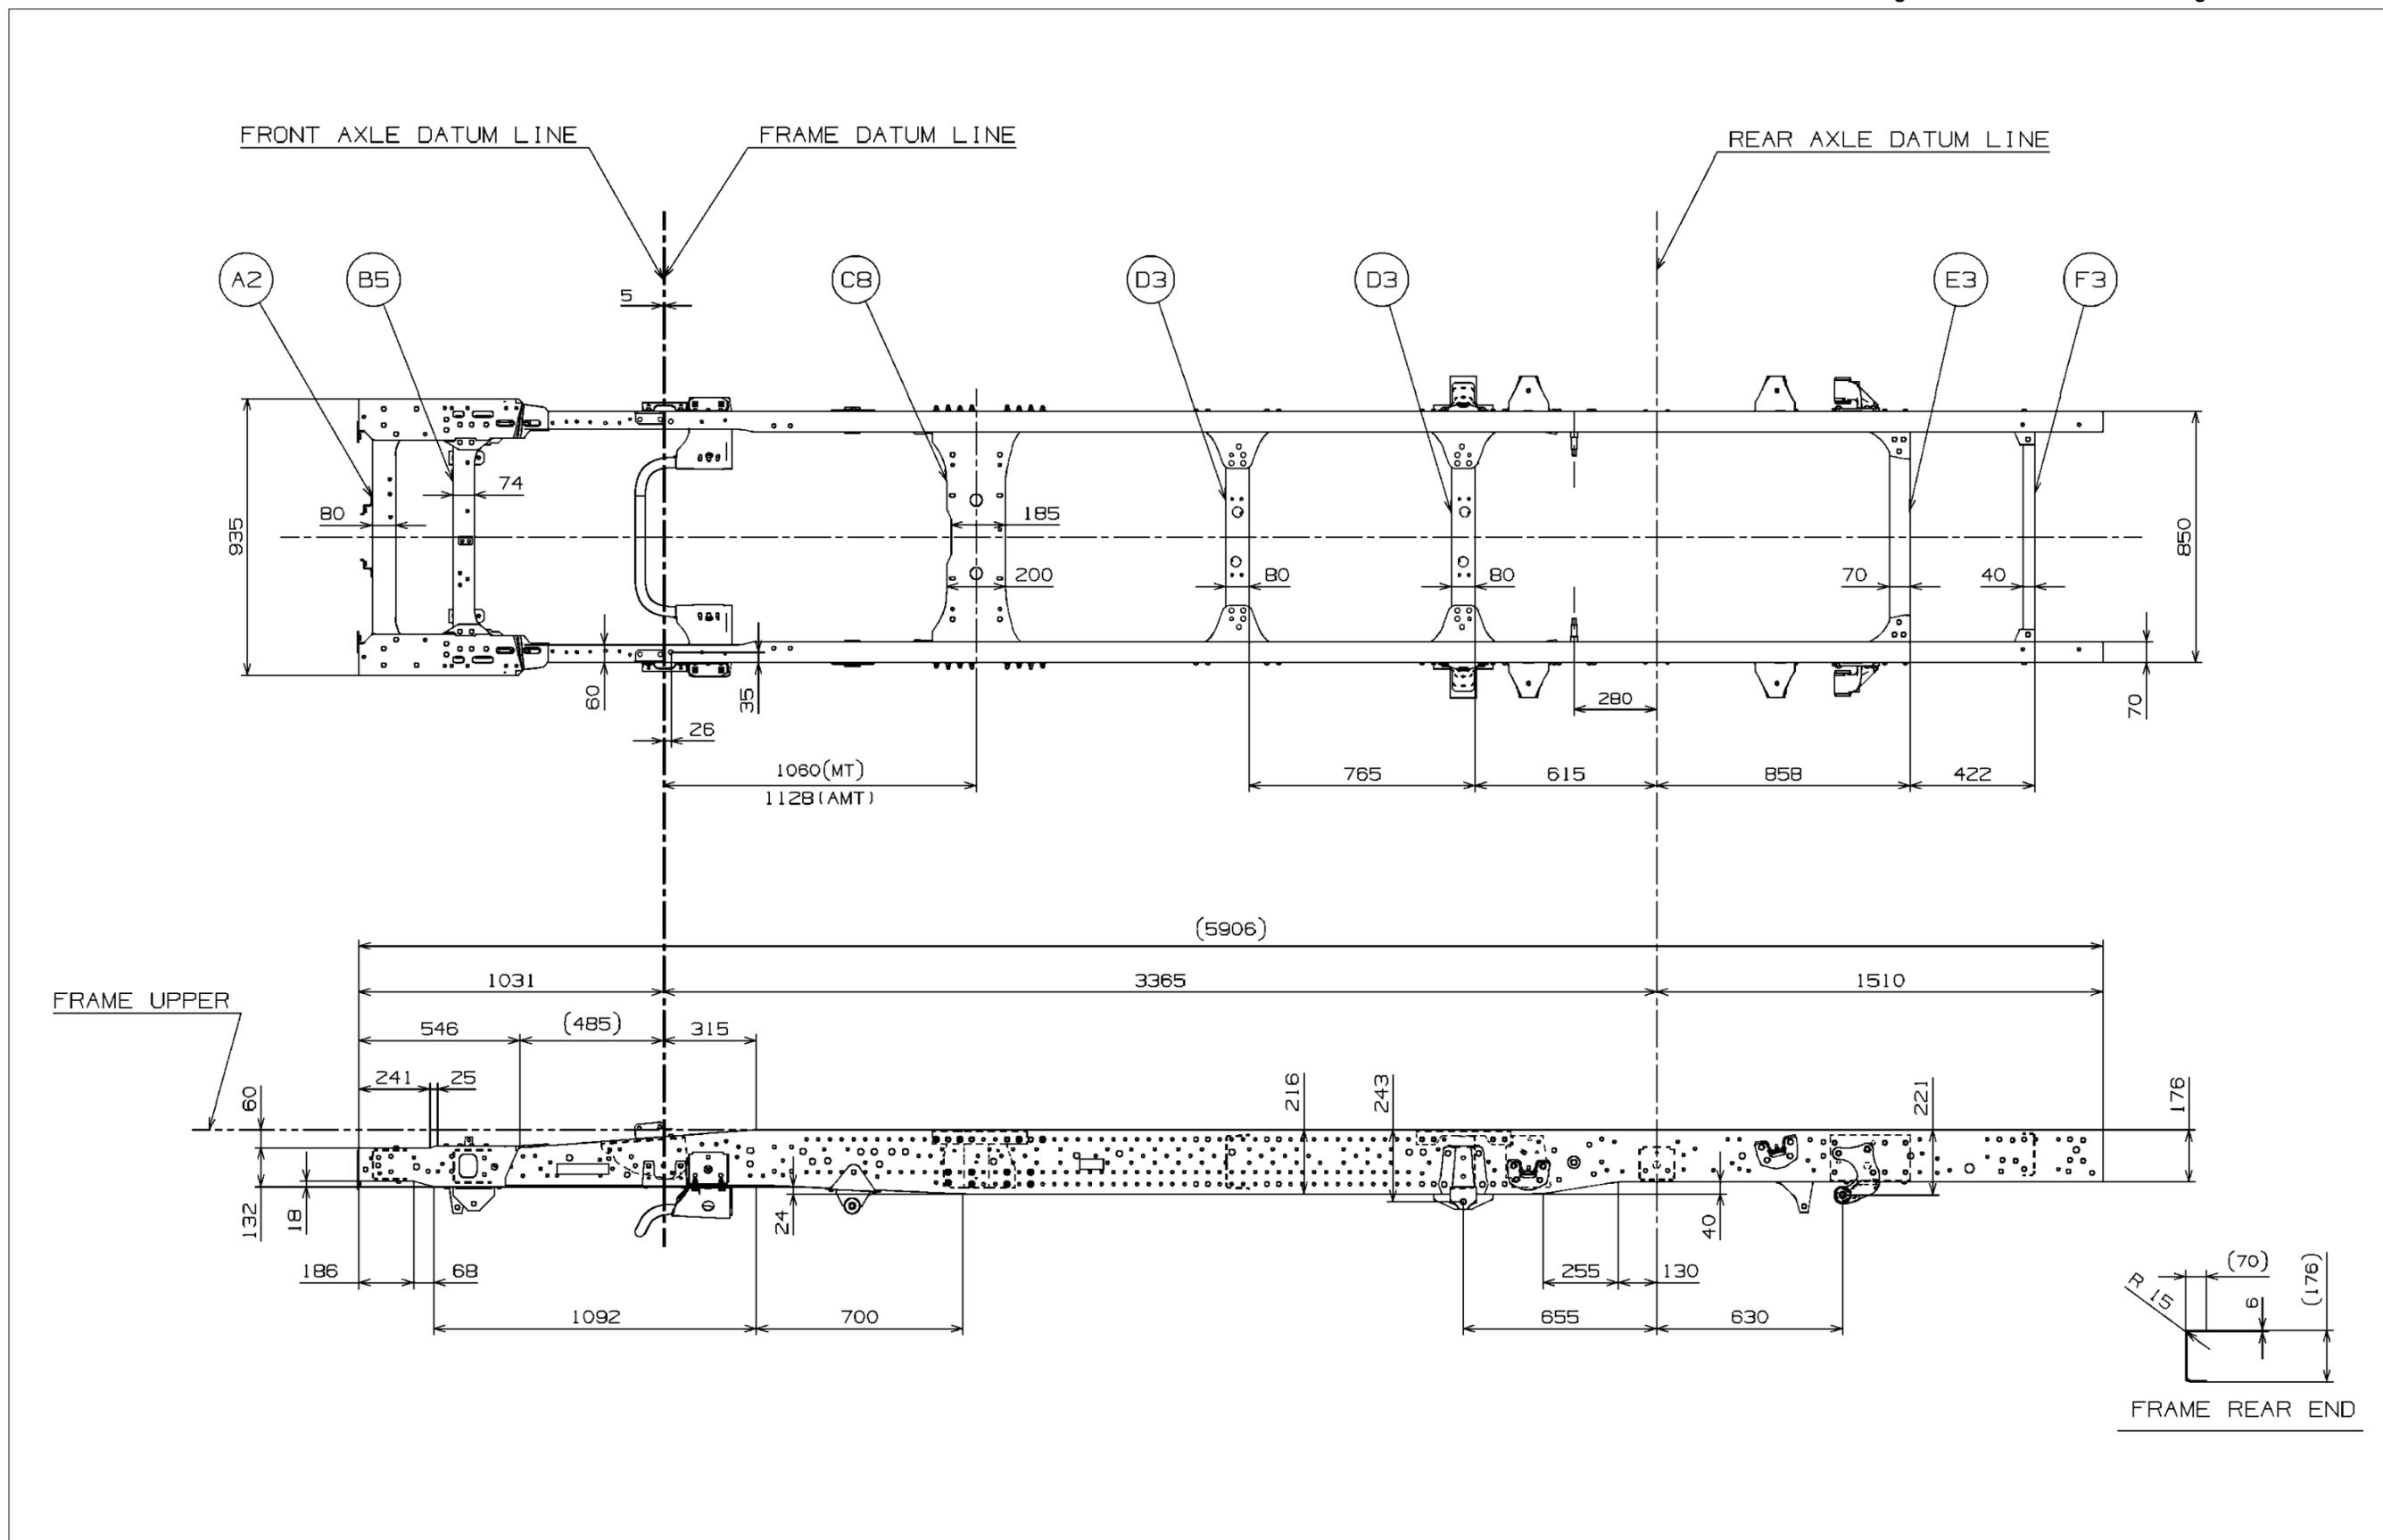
Chassis Frame Drawing NPR85L/U-KL5VAYE
